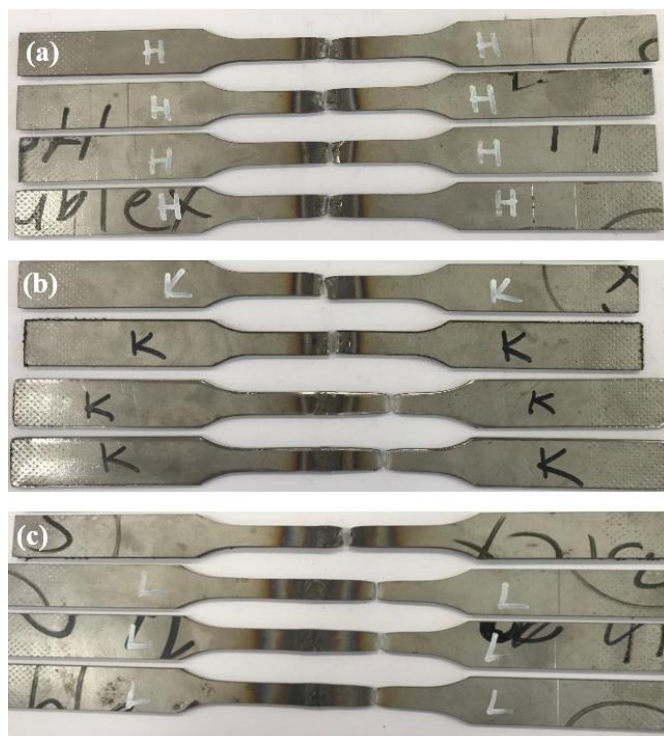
Fracture locations in tensile samples of the welded joints: (a) Low, (b) medium, and (c) high heat input joints.
